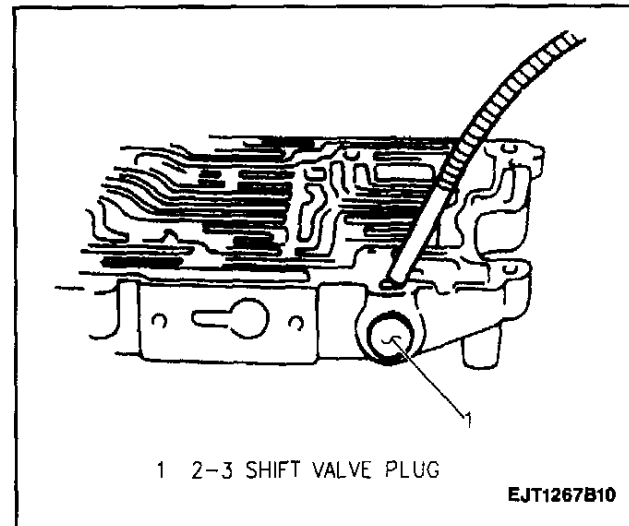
Removing 2-3 Shift Valve Plug (03-72LE, 4-Speed)
